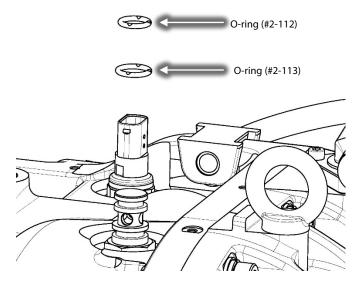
SCR Manifold Return Brass Fitting O-ring Install
